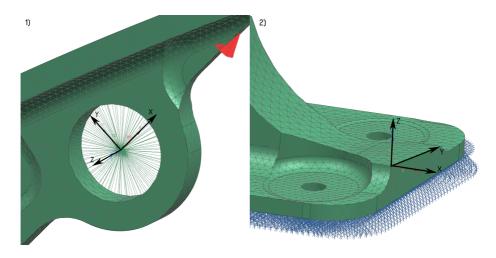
Door Connection Joint; Placement of local CSYS for easier definition of 1) LC1 and 2) LC2
